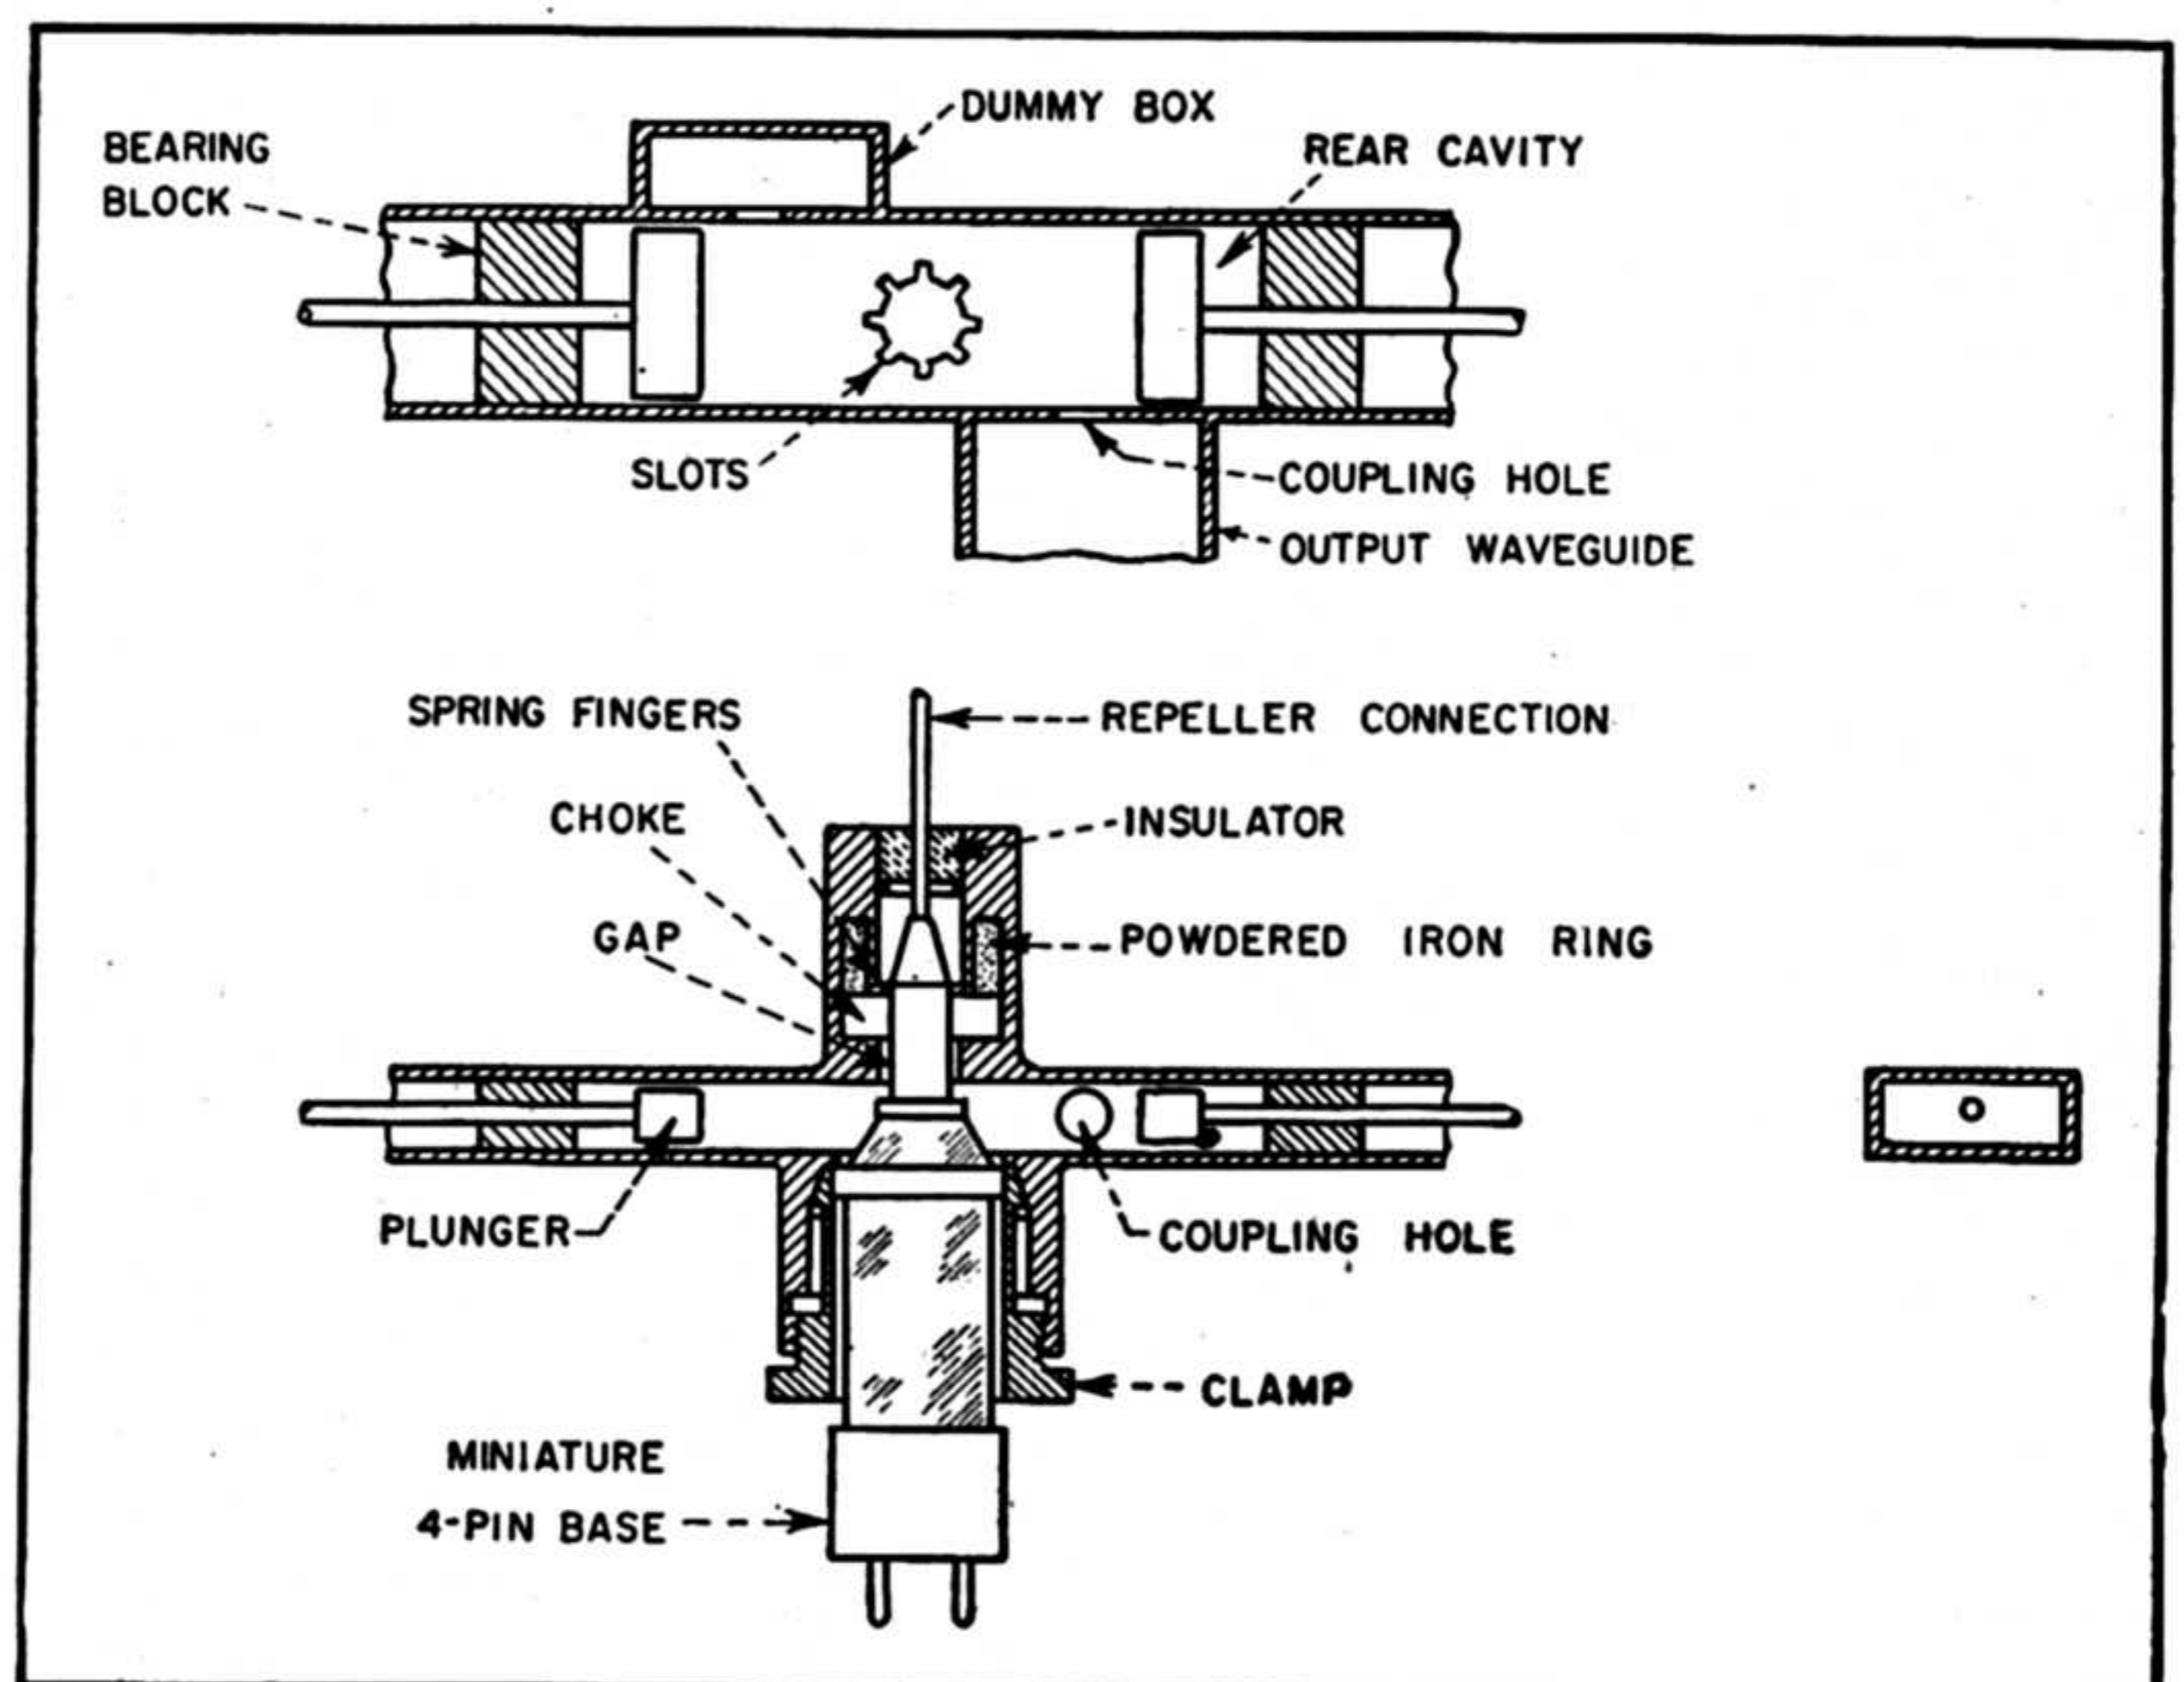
Top, front and side sectional views of tunable waveguide oscillator
